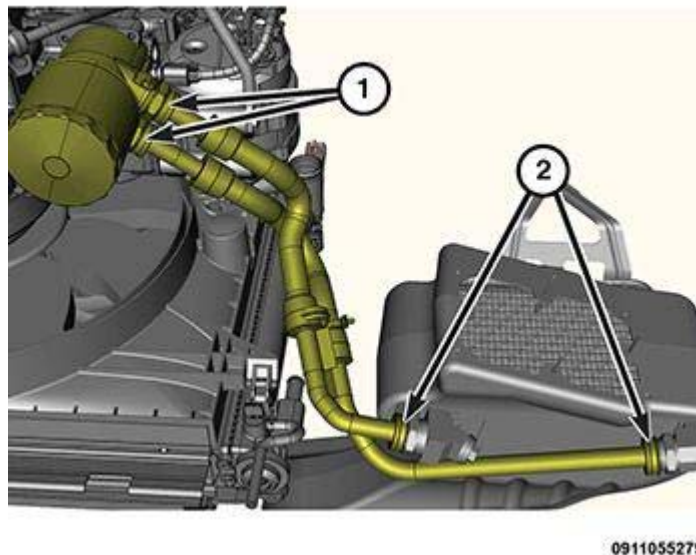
Quick Connect Spring Clips & Quick Connect Spring Clips
